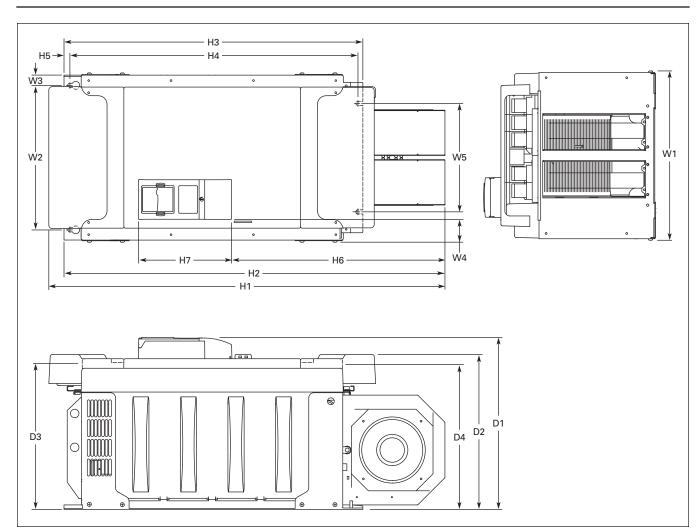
SPX9000 Dimensions, FR10 Open Chassis
